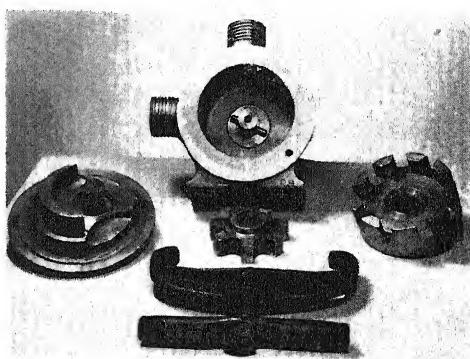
Positive type sanitary pump disassembled. Shaft seal not of newer rotary type. (Photograph by George Doherty, New York City.)
